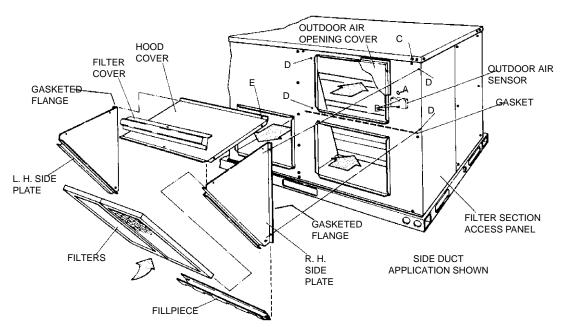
ECONOMIZER RAIN HOOD ASSEMBLY (OPTION)
